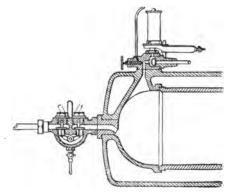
100 i.H.P. fielding engine, showing starting gear
